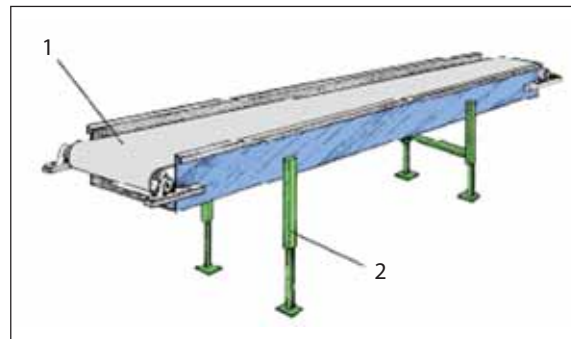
A belt conveyor with a smooth flat loop (1) of white material mounted over rotating rollers. Adjustable legs (2) allow the conveyor to be raised or lowered (Reyes 1988)
